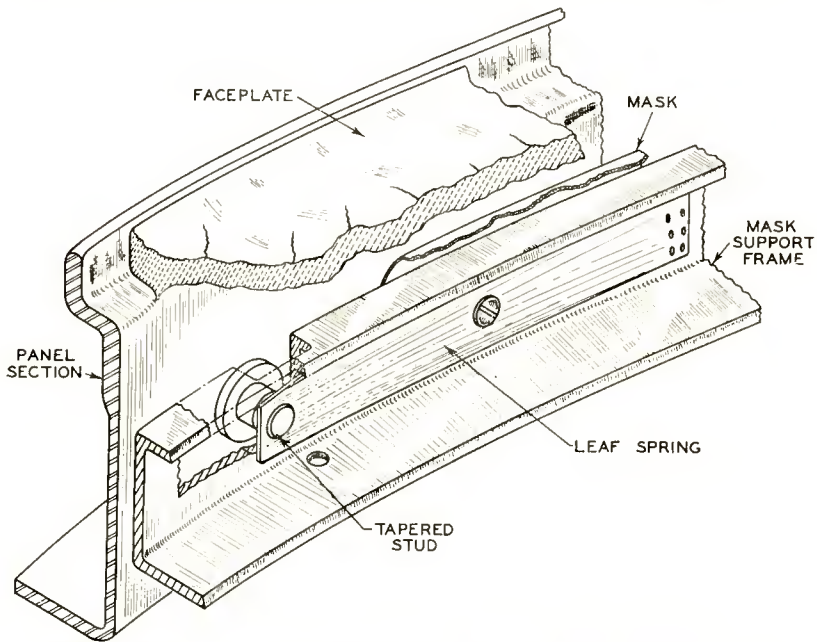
Detail of spring mounting for shadow-mask support frame.
